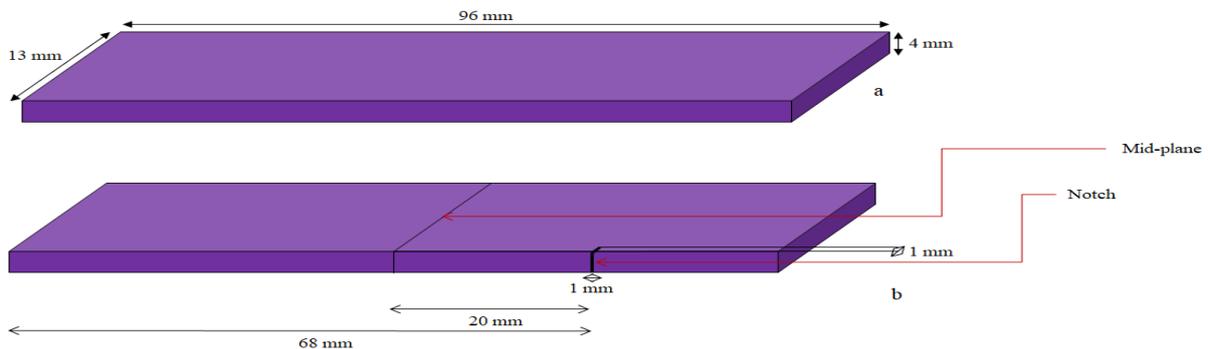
Specimen dimensions for Three Point Bend (TPB) test as per ASTM D7264
